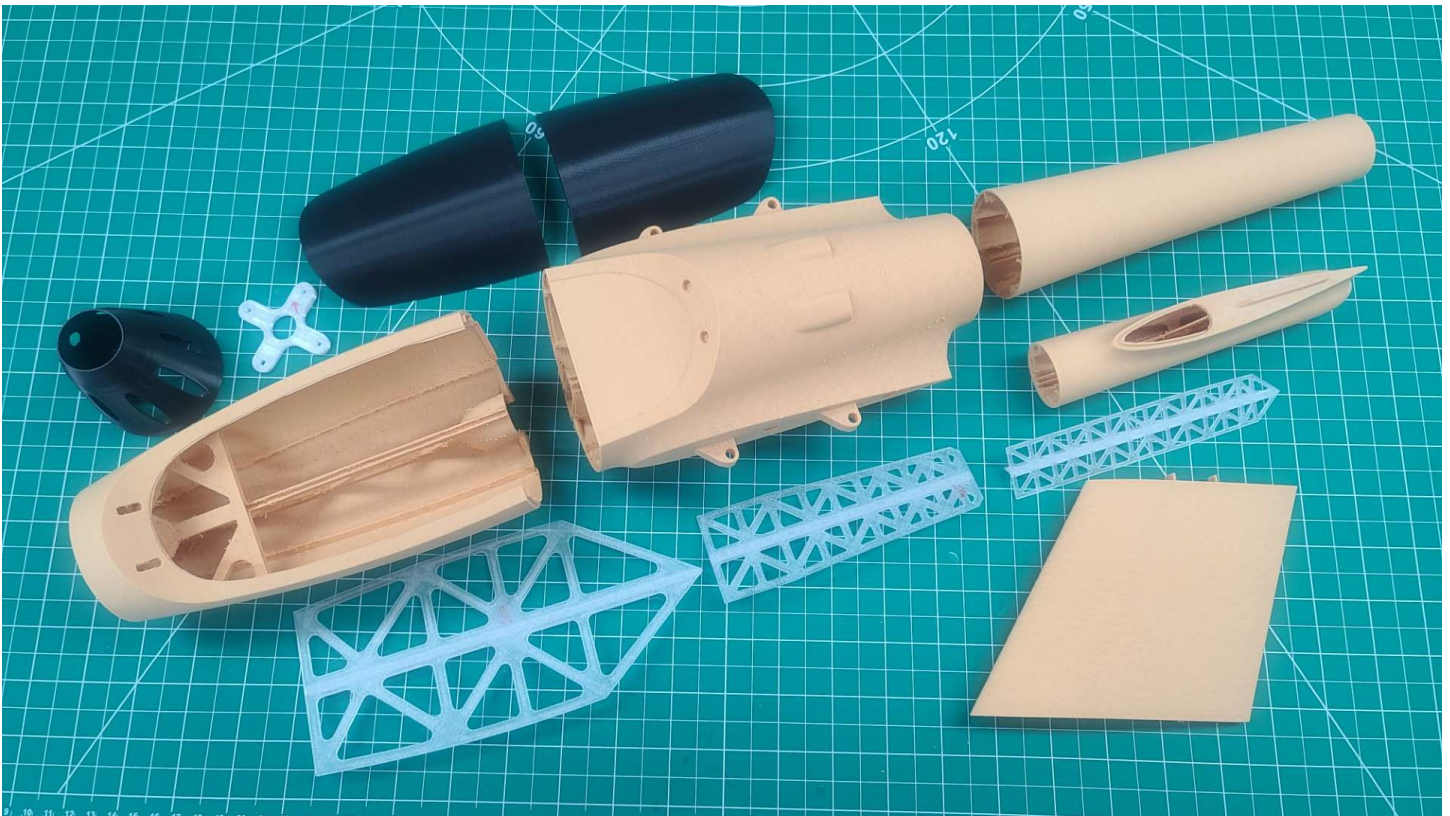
X-100 Infinity Wing V2 Fuselage Parts
